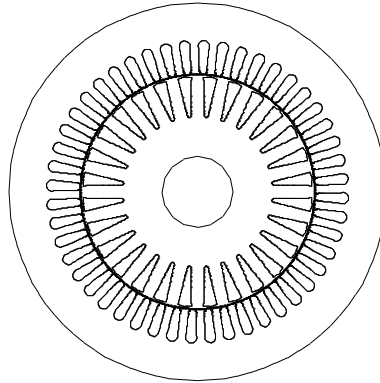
Cross-sectional geometry of the 1.1 kW cage induction motor.
